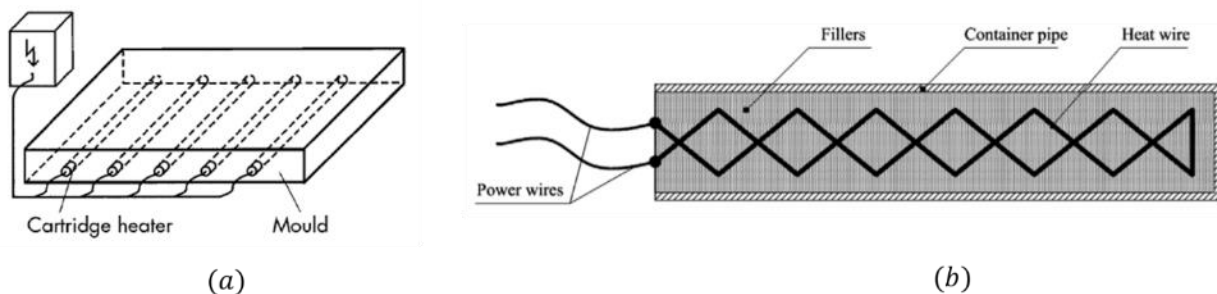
Cartridge heaters: (a) a schematic of the mold [9]; (b) a typical structure [14].
